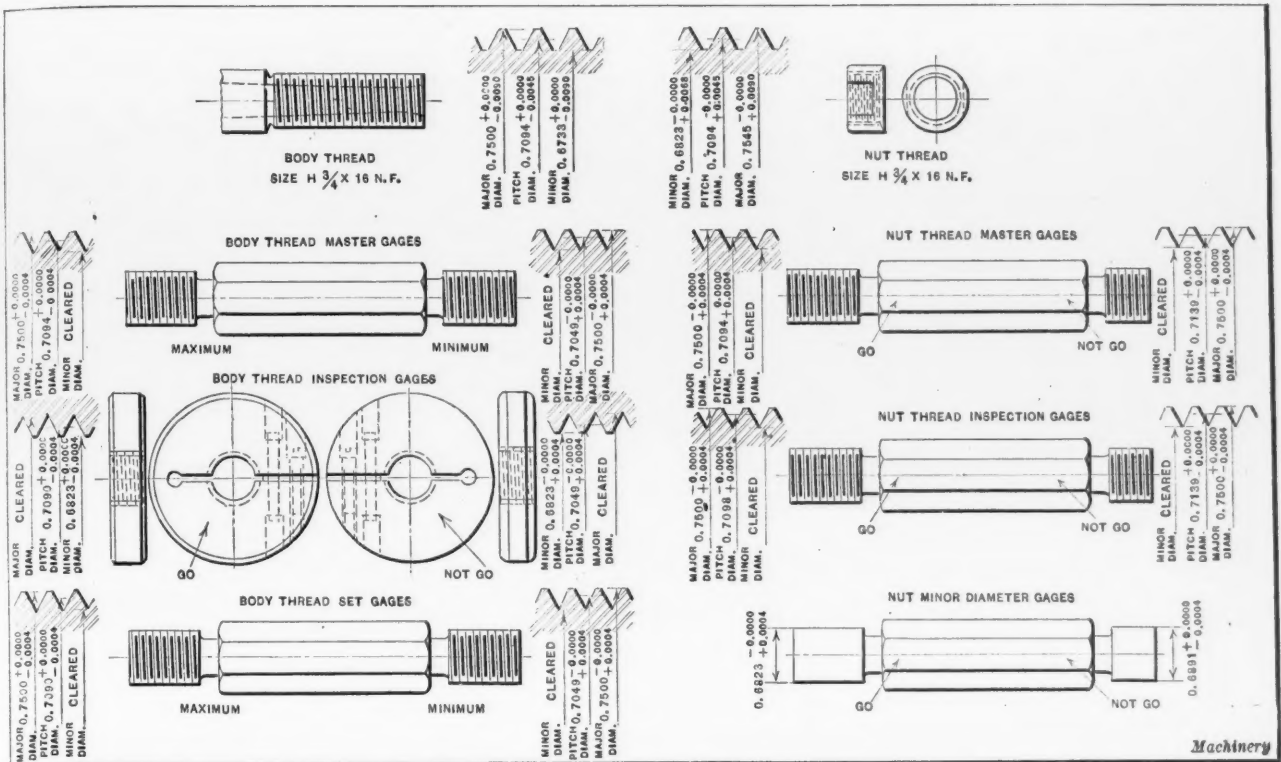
Detailed Dimensions of Gages used in producing the Threaded Part of the Body and the Nuts of the Reamers
